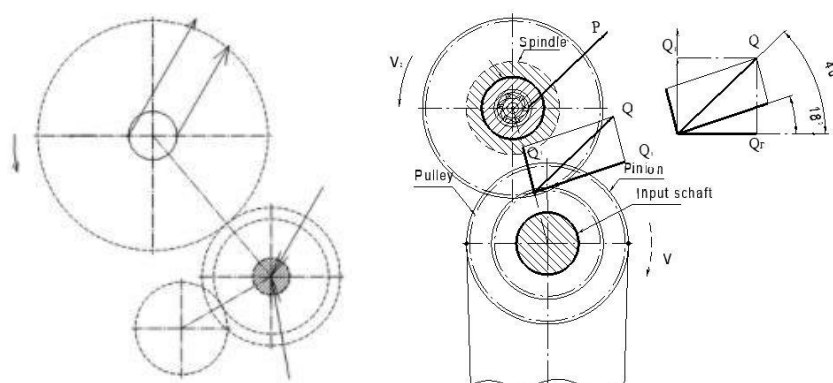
Transverse drive shaft layout: a) force diagram; b) layout sketch
